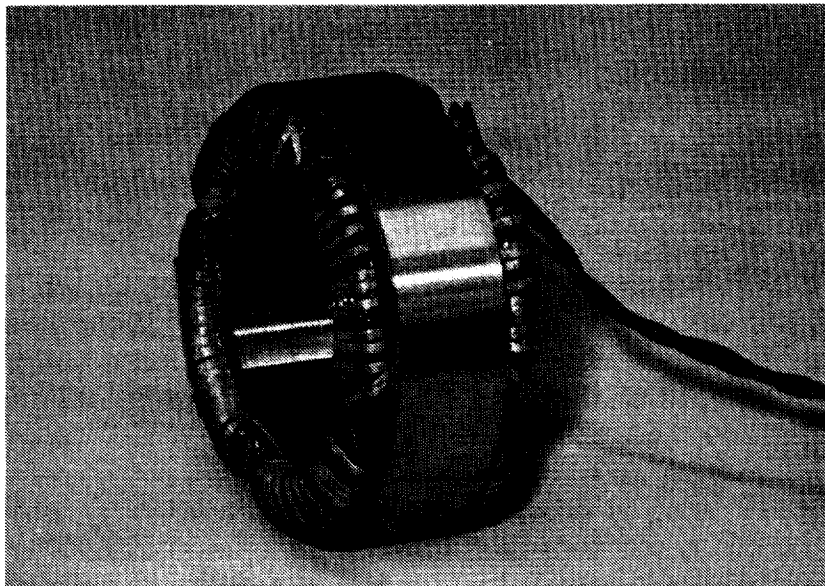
Permanent Magnet Bias Bearing Stator Assembly
